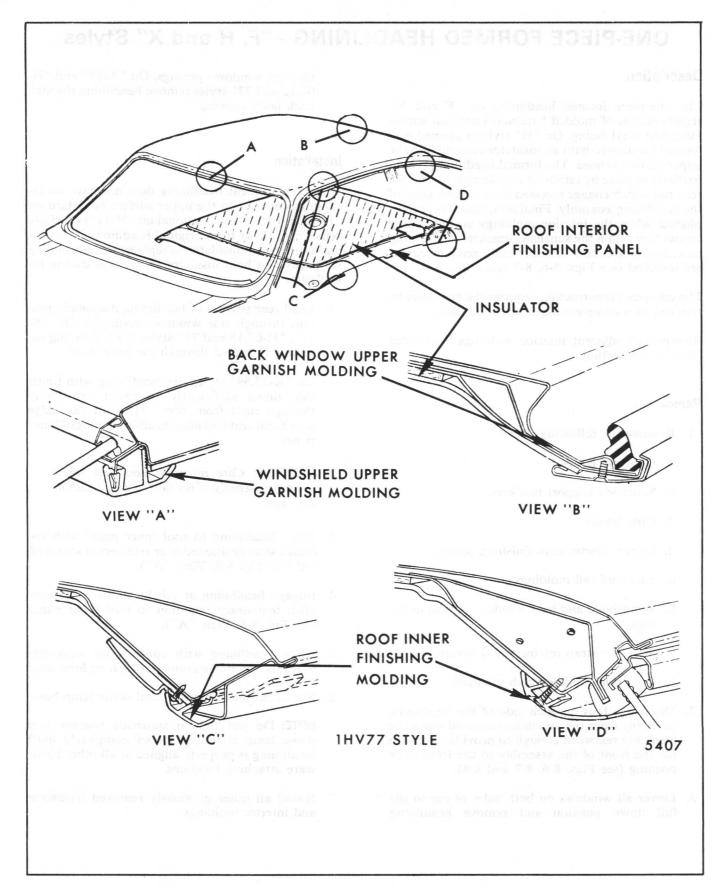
Headlining (Roof Interior Finishing Panel) Assembly - "77" Styles ("07" Styles Similar)
